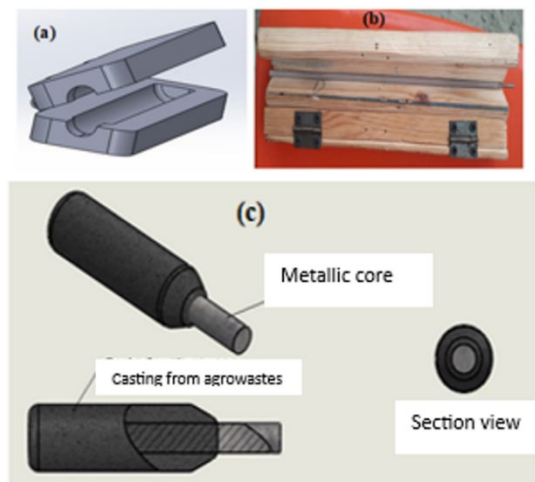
Mould & electrode development (a) 3D view (b) Developed mould (c) Model of welding electrode
